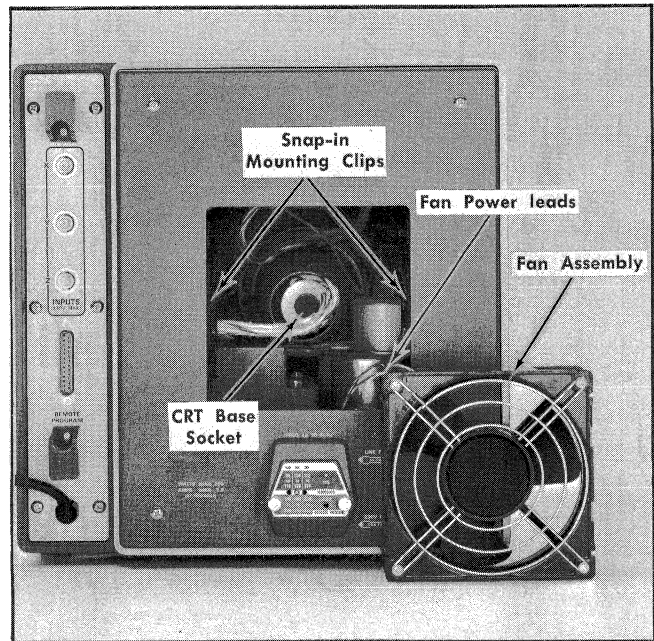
Fan Assembly removed from the fan snap-in mounting.
